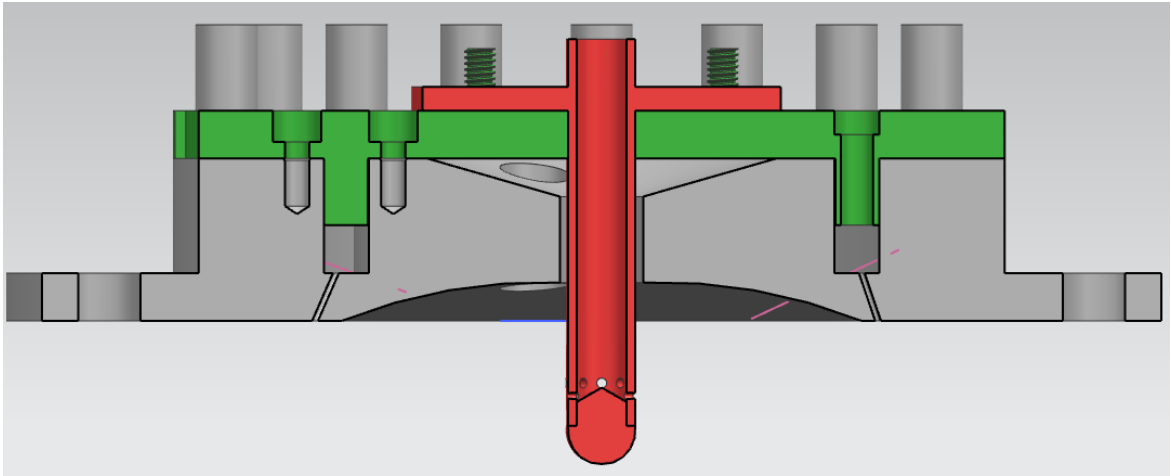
Cross section view of non-welded version of pintle injector
